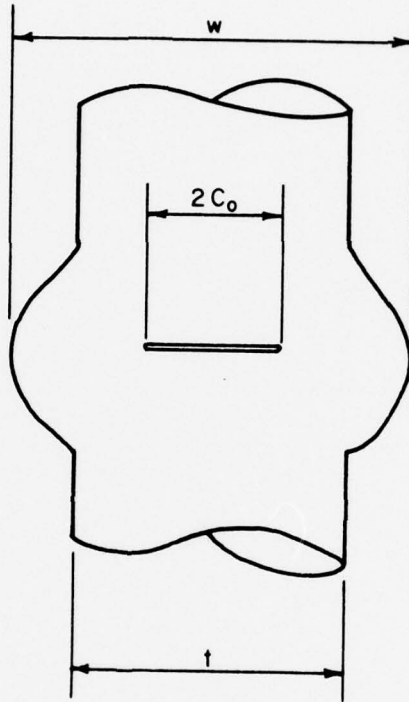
Width (w), plate thickness (t), and defect width ($2c_0$) describing LOP test piece defects
